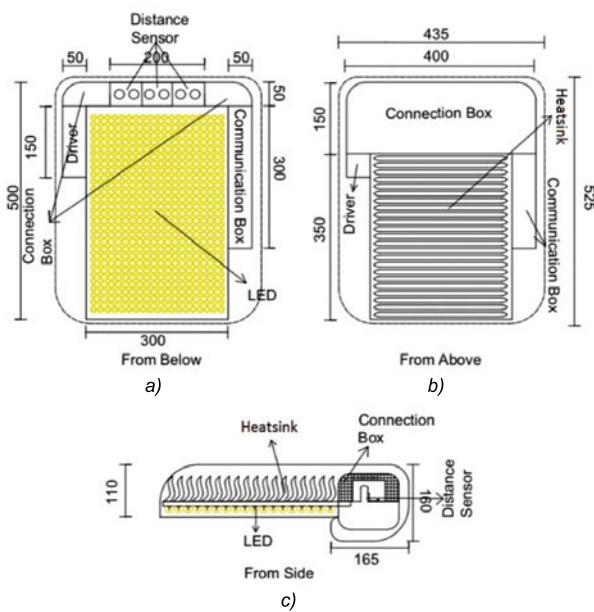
Demonstrations of the designed luminaire: bottom view (a), top view (b), side view (c)
